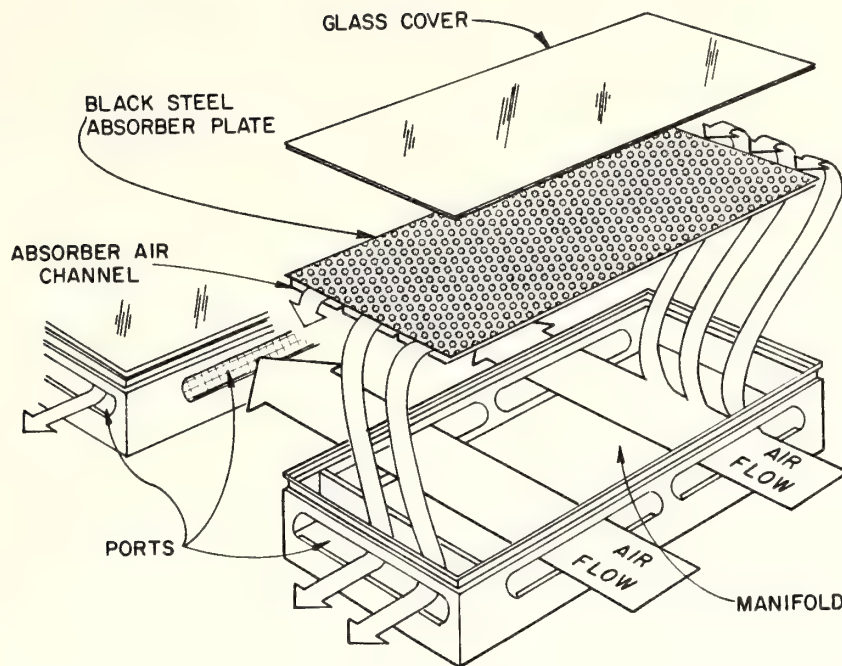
Air Collector with Ducts Beneath Absorber and Internal Manifolds (Exploded View)
